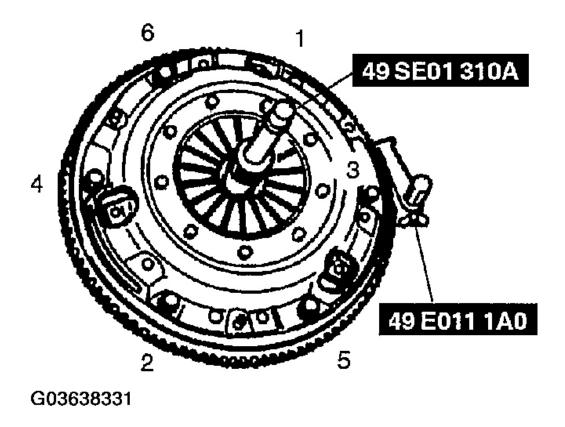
Installing Clutch Cover Courtesy of MAZDA MOTORS CORP.
